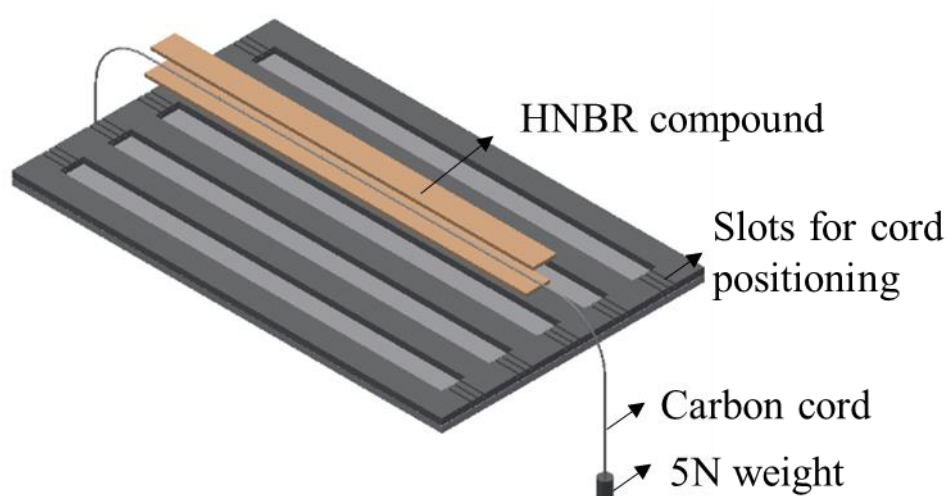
A specially designed mould used for making CC-HNBR model composite samples. The carbon cord was positioned in the middle slot.
